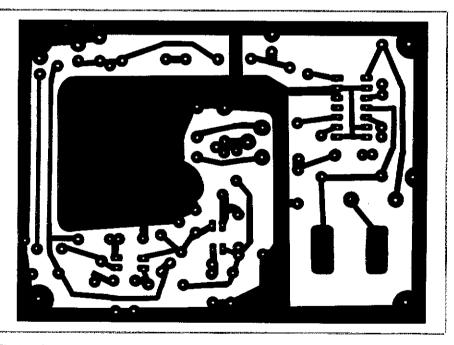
Circuit-board etching pattern for the general-coverage receiving adapter (see the parts avout of Fig. 2). Black represents copper. The pattern is shown at actual size from the foil side of he circuit board.
